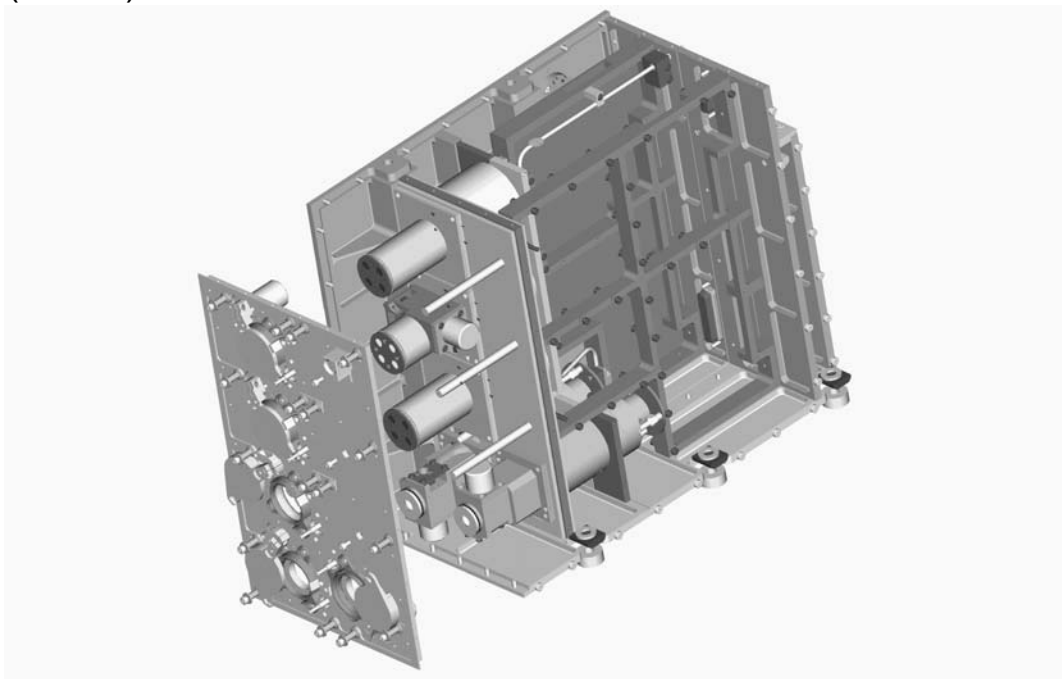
Drawing of the PREMOS package with covers, instruments, and frames for the electronic prints.
